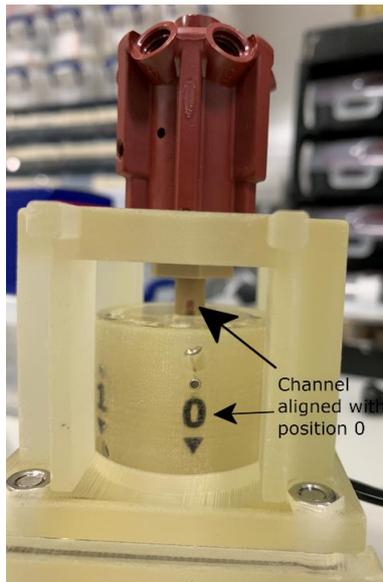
The shaft coupling was rotated such that it faced the opposite way than the cables connecting the motor. The groove in the shaft of the valve head was aligned with position 0.
